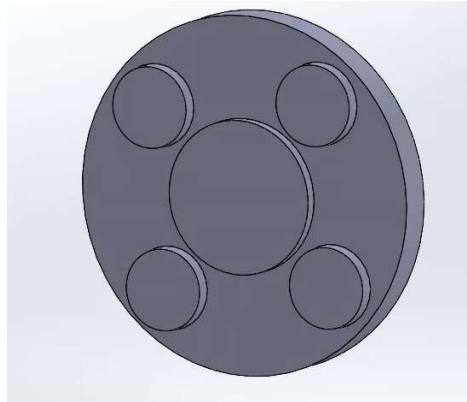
Outside piece for tail attachment (tails can be attached to the 4 magnets shown)
